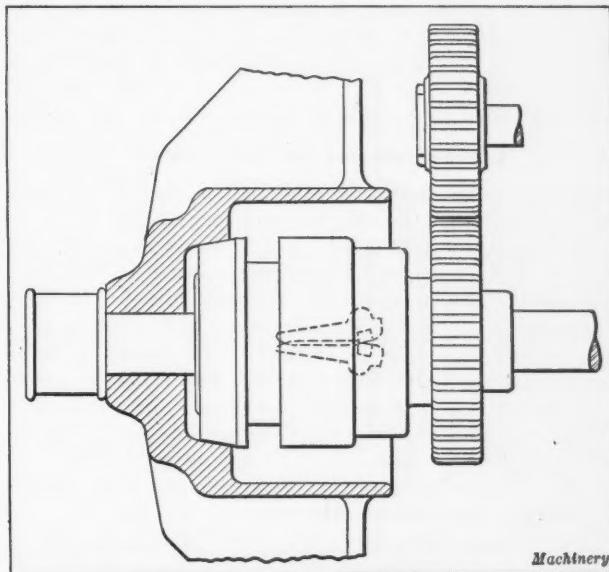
Friction Clutch applied to a Geared-head Engine Lathe and arranged to act as a Brake when disengaged
